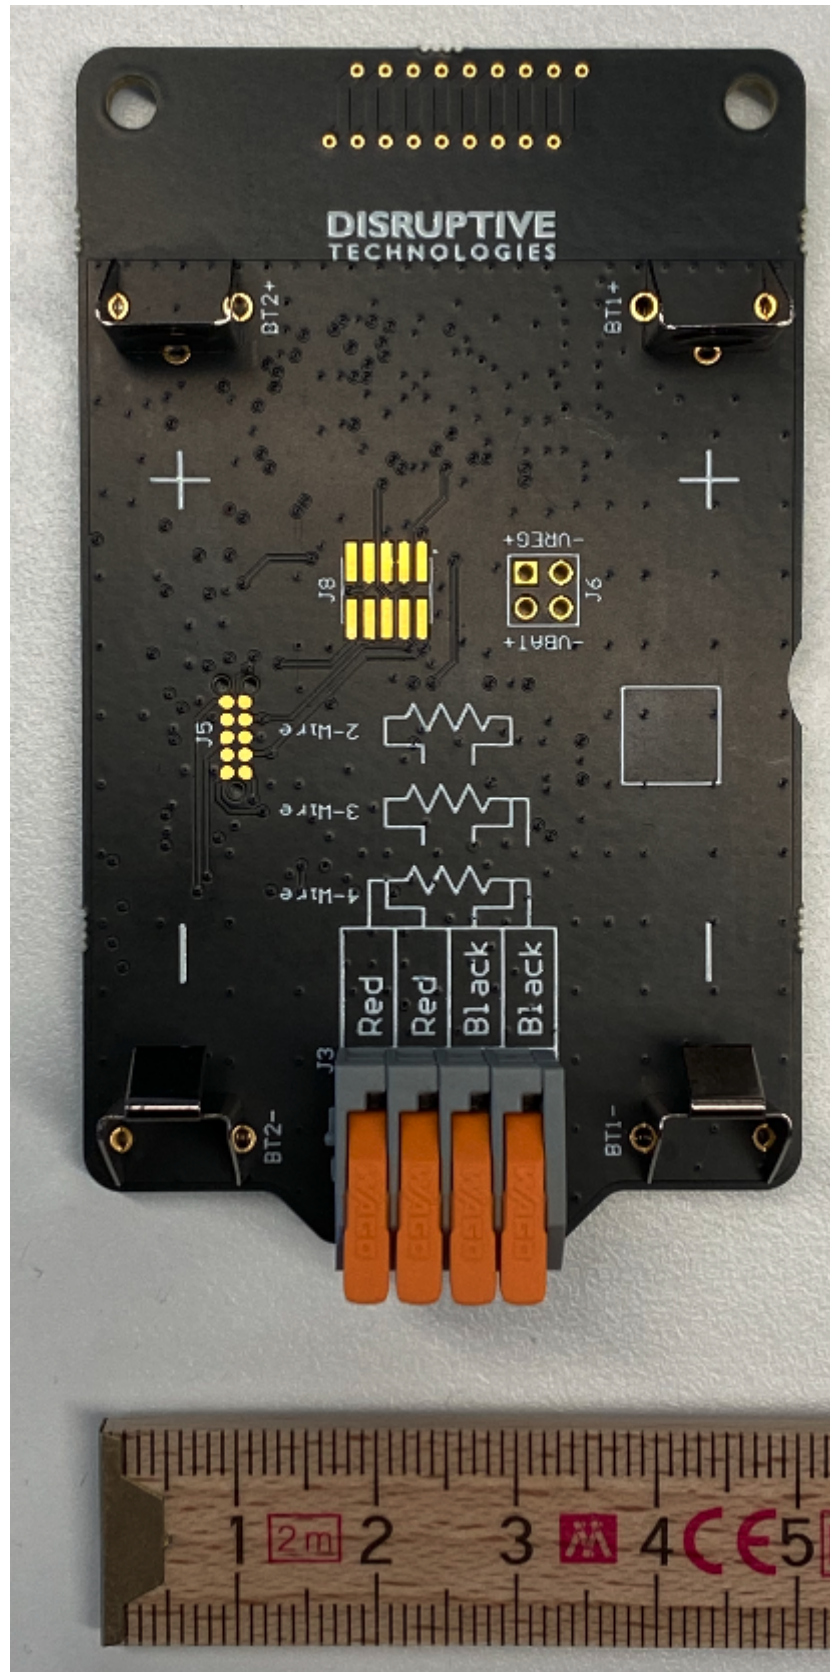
Picture of the back side of the PCB inside 102774 - Temperature Probe Sensor US.
